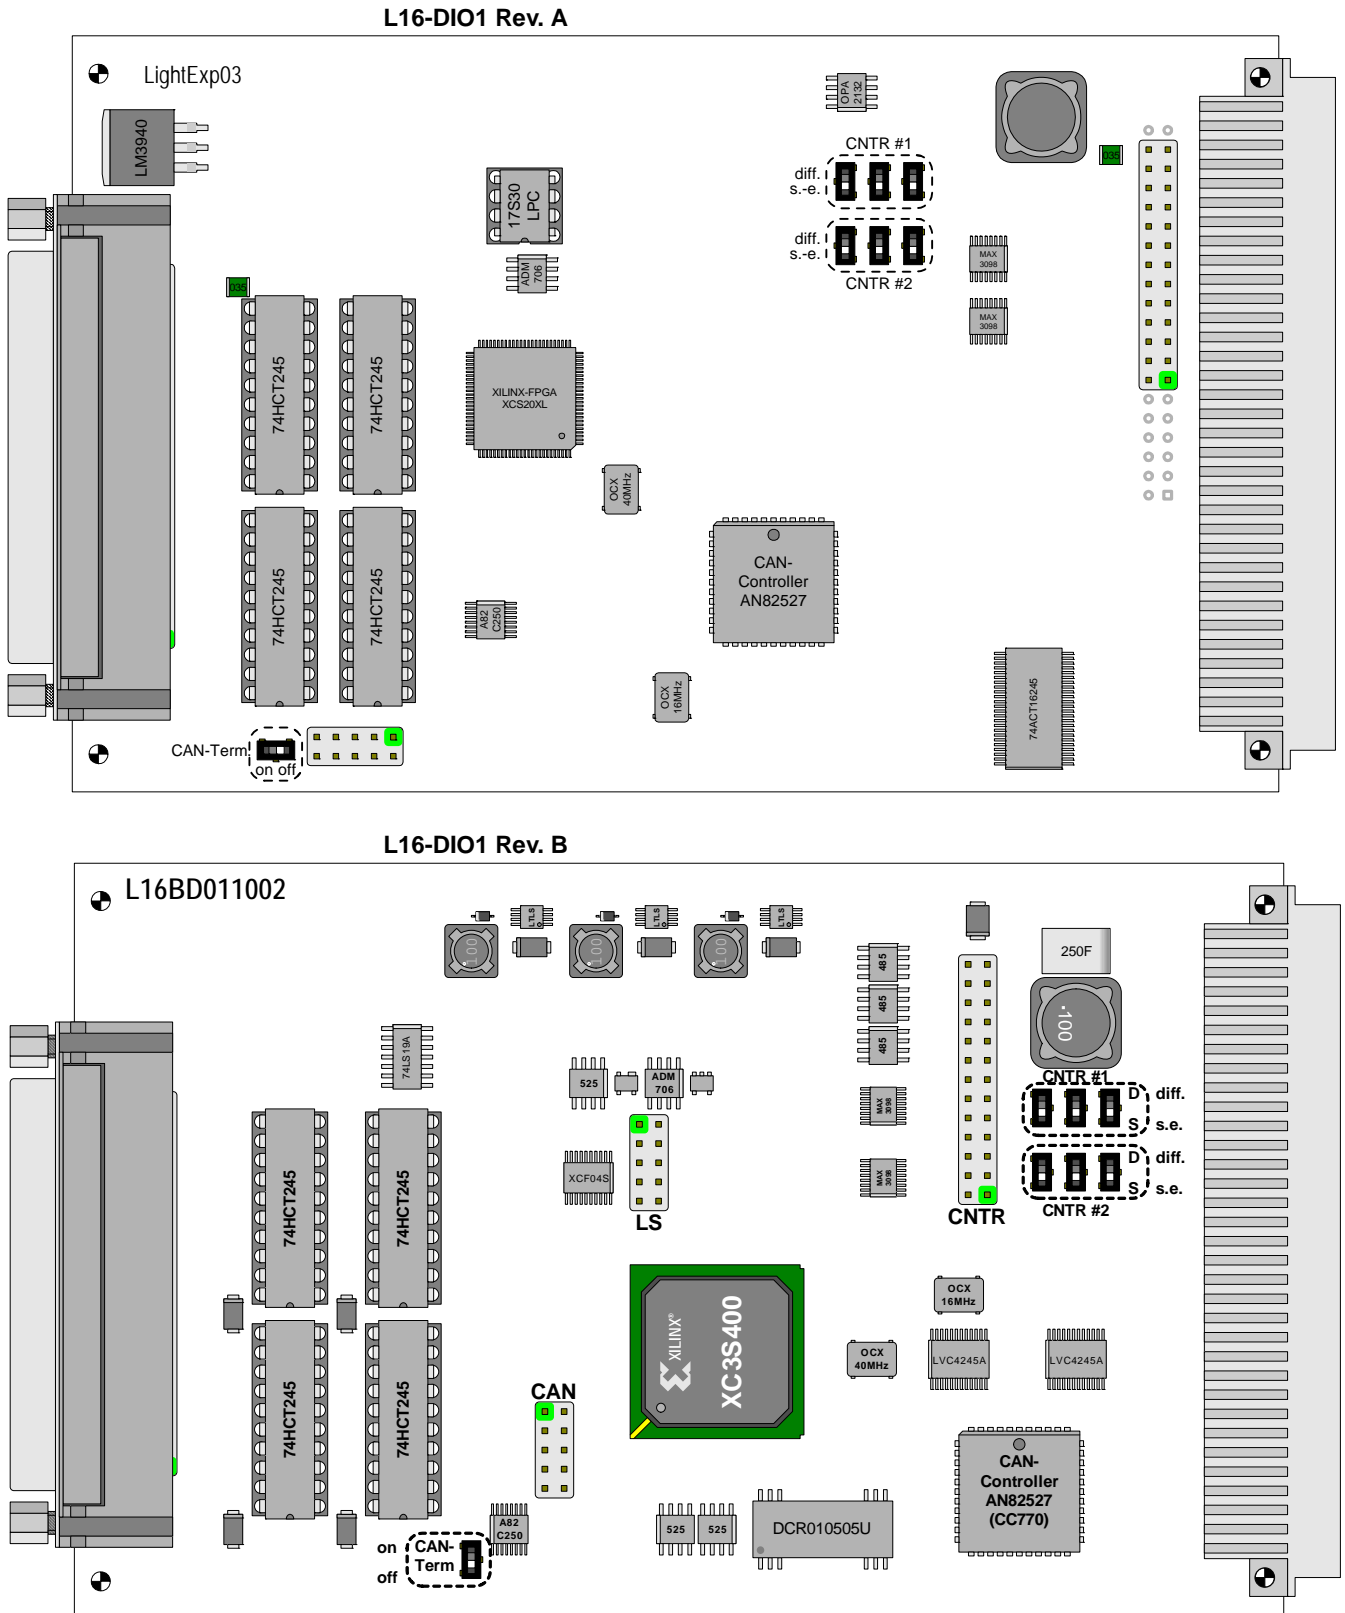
Position of the DIP switches on the DIO1 PCB
